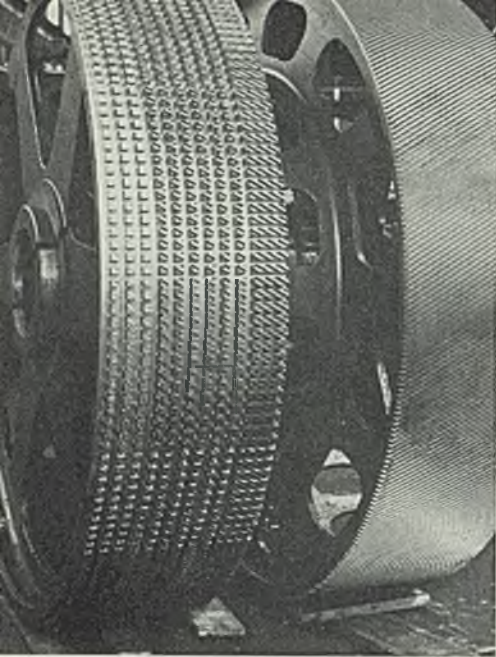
This large cast-steel gear was machined to expose alternate 1-inch squares; absence of defects was a tribute to foundry practice
